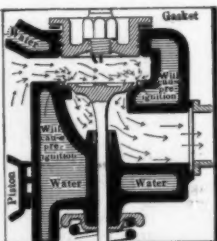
Section of a motor cylinder showing the fins which will cause pre-ignition if the valve seats are not refaced.
